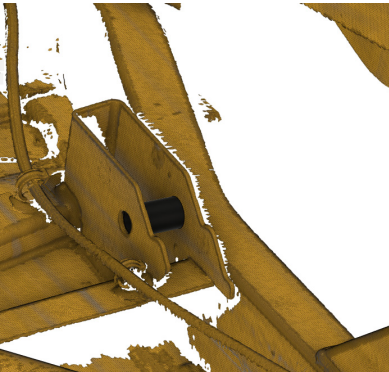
& FIG 6 - Mount Relocation Bracket into Position
